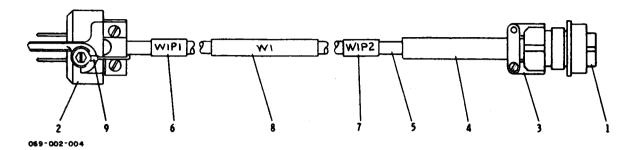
Power Cable Assembly (PN 4035453-0501)
